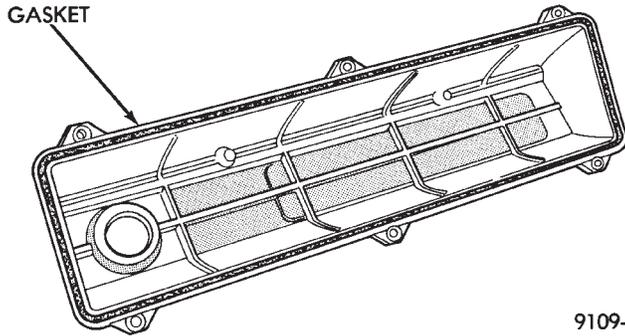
Cylinder Head Valve Cover and Gasket Assembly
